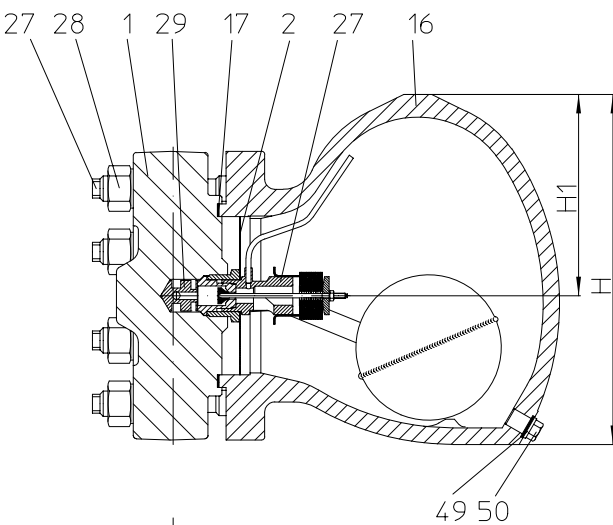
4 with butt weld ends - horizontal installation
